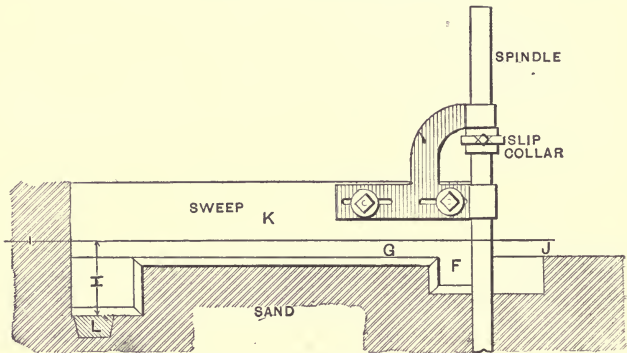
SECTION SHOWING SWEEP FOR MAKING THE RIMS.
